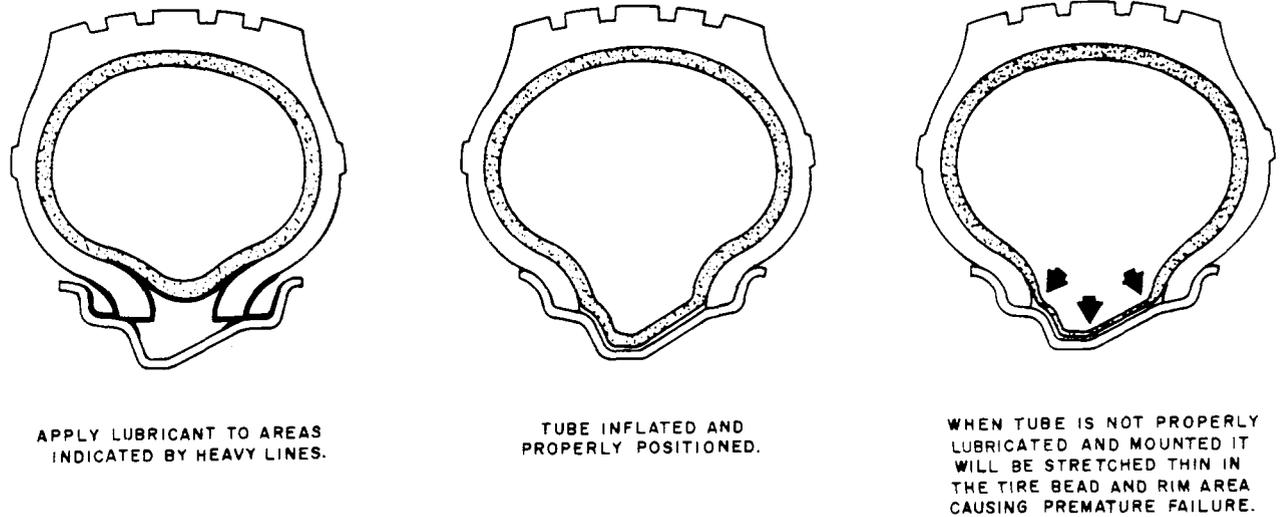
Areas Requiring Lubrication When Mounting Tube-Type Tire
